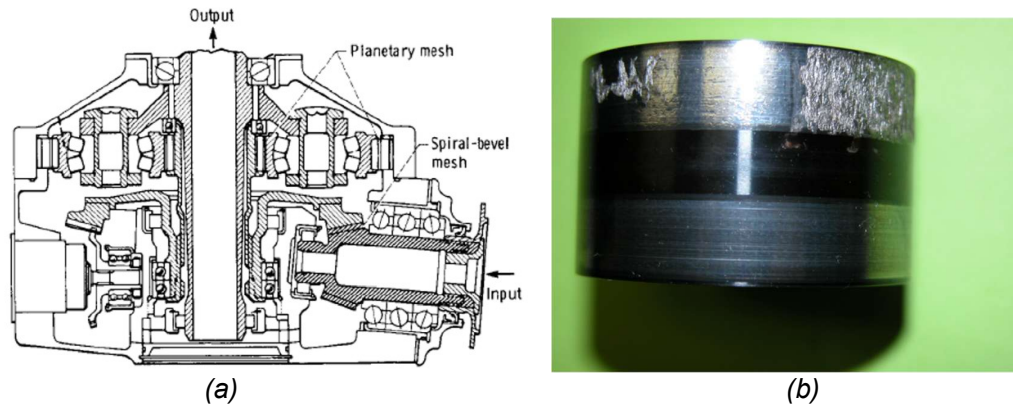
(a) the Bell-206B MRG cross-section view showing the 3-planet version with spherical rolls whereas the 4-planet version has cylindrical rollers, and (b) the damaged inner race of one planet bearing inside the MRG.
